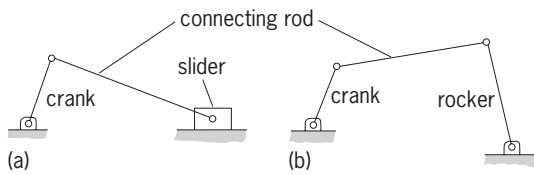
Connecting rod in (a) slider-crank mechanism and (b) crank-and-rocker mechanism.
